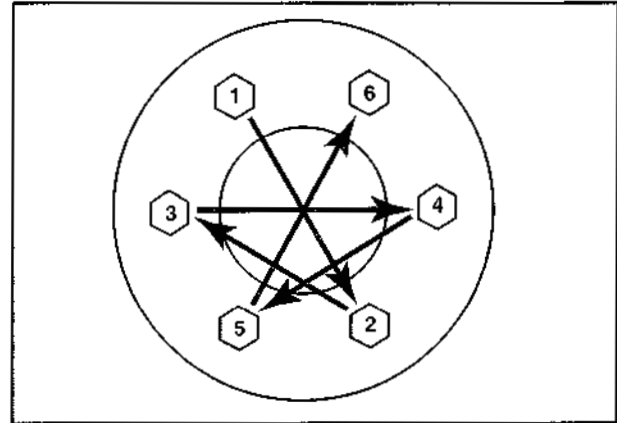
When installing a propeller on a flanged crankshaft, be sure to follow the manufacturer's recommended tightening sequence to avoid inducing stress in the propeller hub.
